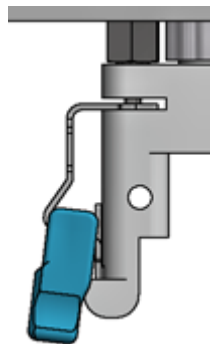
LATCH SPRING SECURING PIECES
